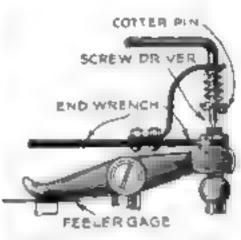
Timesaving tool for adjusting overhead valves fitted with elotted bolt and lock out.
